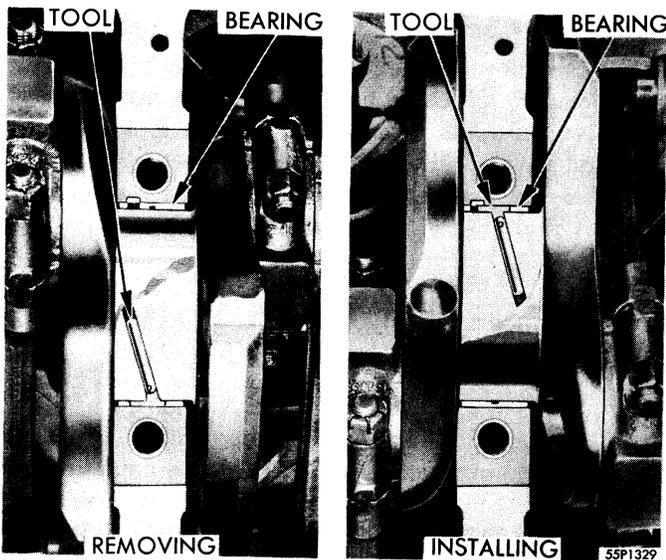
Removing and Installing Main Bearing Upper Insert with Special Tool
